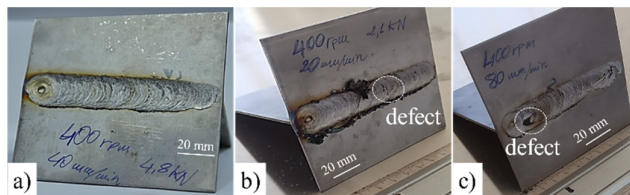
experimental test using double shoulder tool for 400 rpm and (a) 40 mm/min (b) 20 mm/min and (c) 80 mm/min case studies
